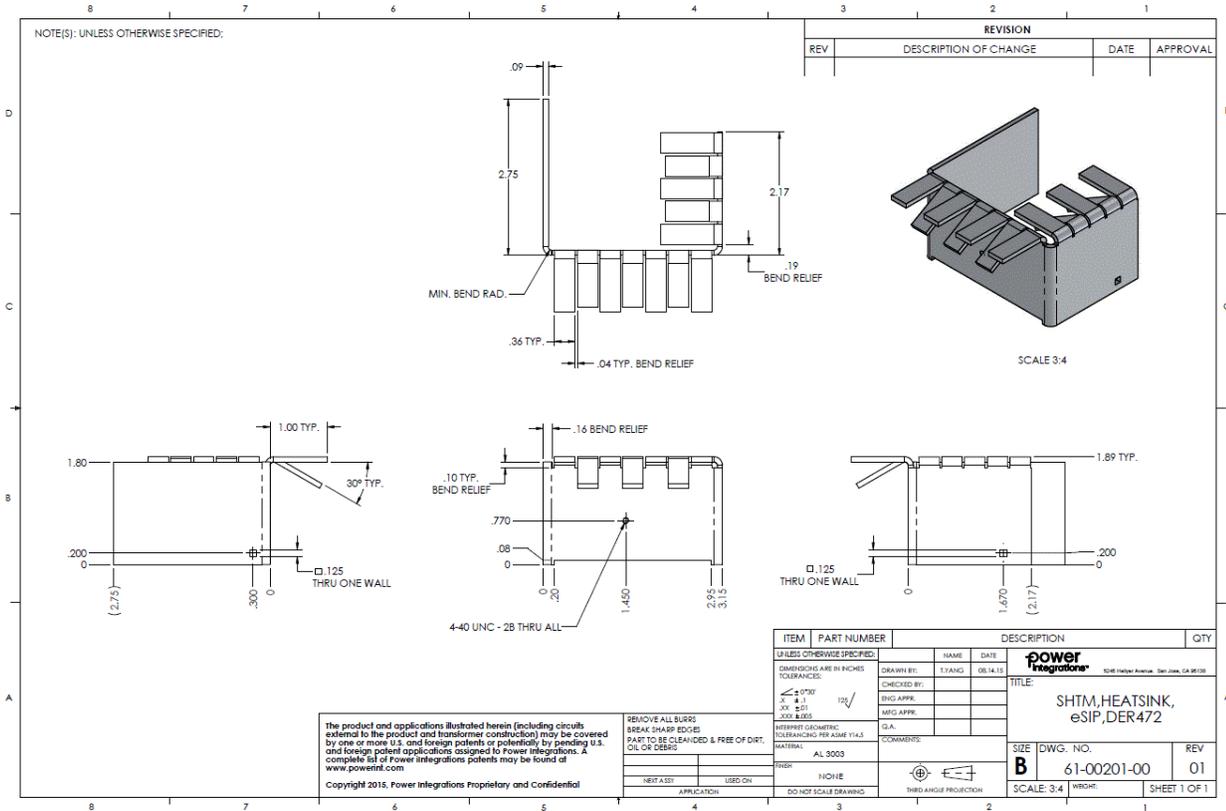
DER-472 Primary Heat Sink Sheet Metal Drawing.
